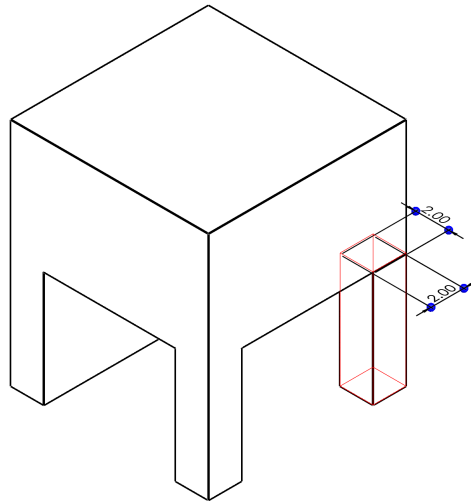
Powder Removal holes for Shell parts in BJT/M
